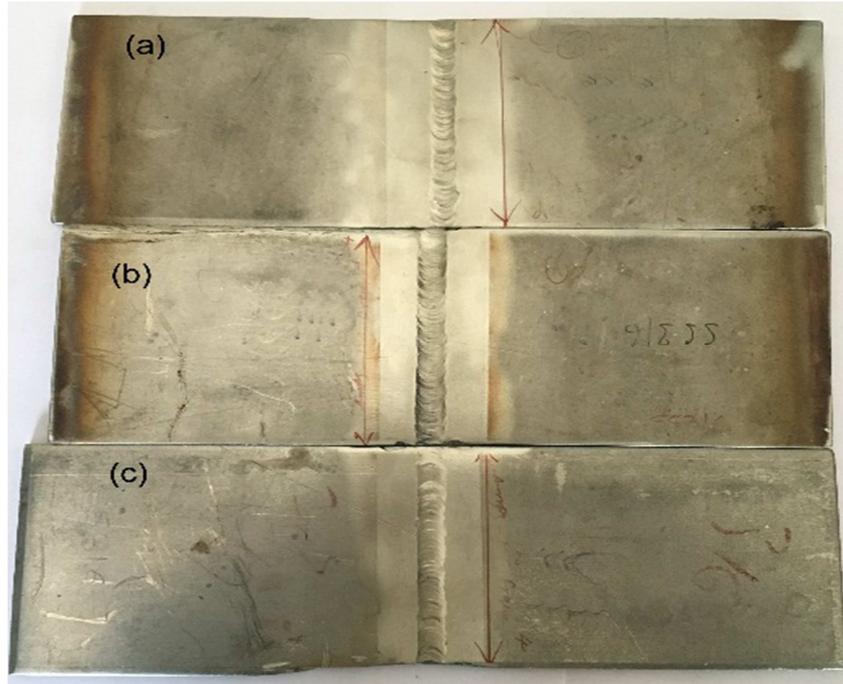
Dissimilar welded joints of AISI 316 and Monel 400
